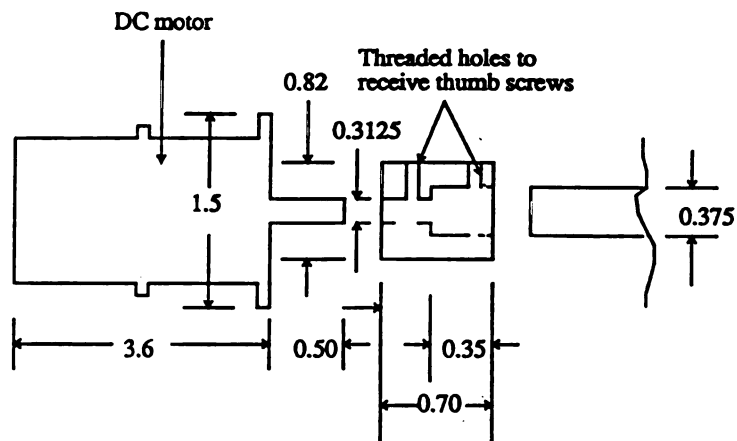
Attachment of drive motor to drive shaft case-hardened roller.
